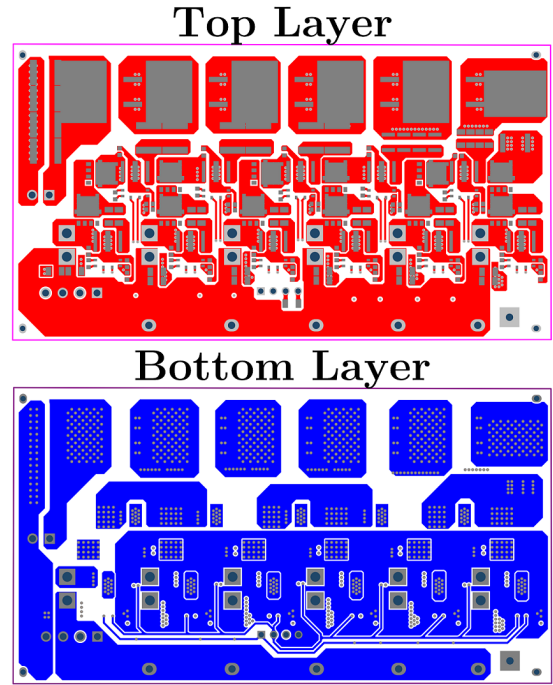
PCB layout of the 20 V-240 V/535 W LEGO-Boost converter. The PCB size is 110 mm×60 mm and is highly modular. All components are placed on one side of the PCB.
